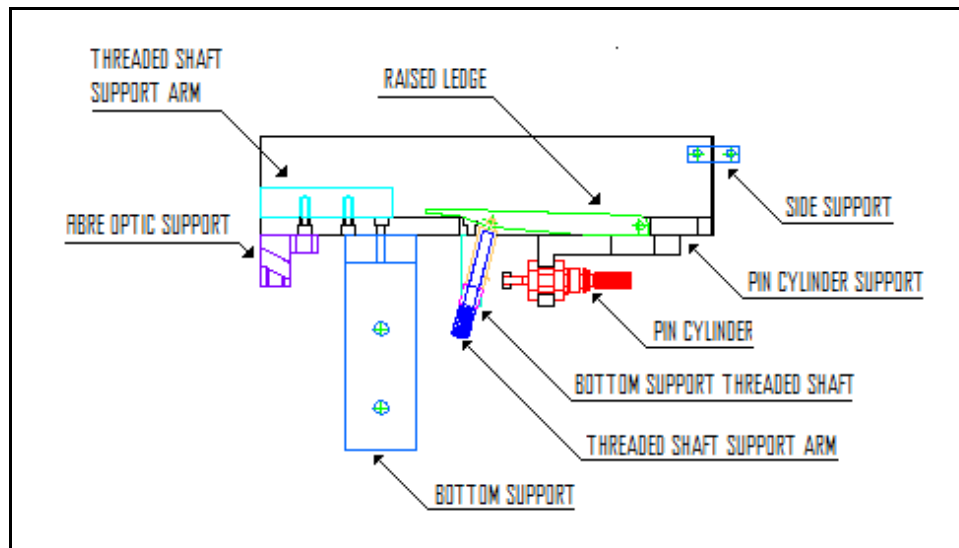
Front View of the Programmable Edge Riser Tool
